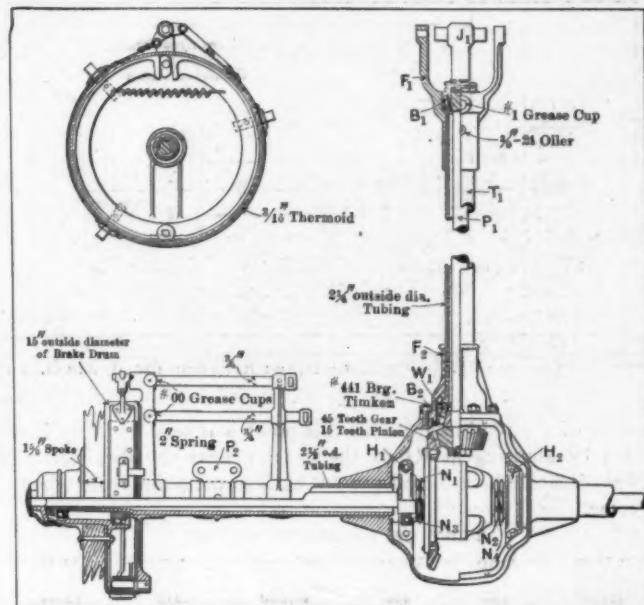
Live rear axle, showing torsion tube, propeller shaft, bevel drive and floating system
